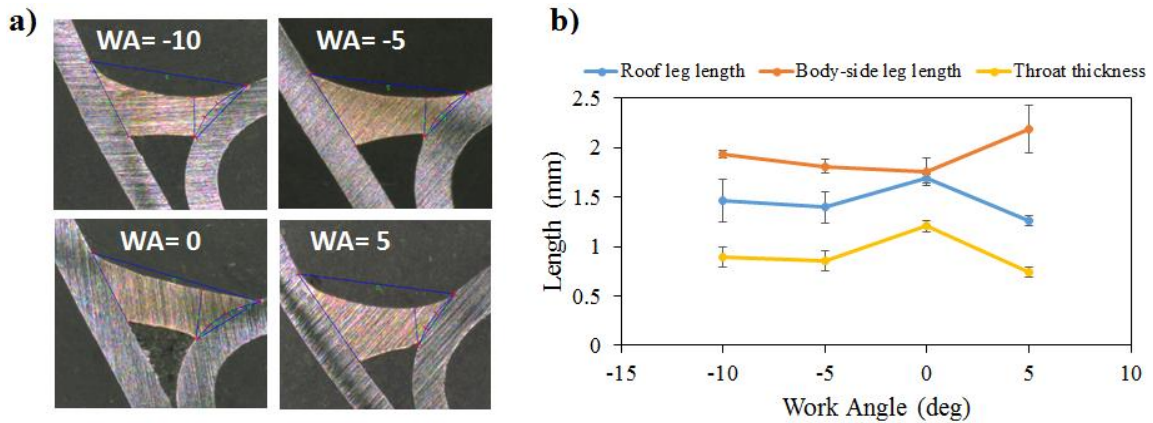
(a) Micro sections of brazed coupons at different WA angles, (b) dimensional values of brazing seam.
